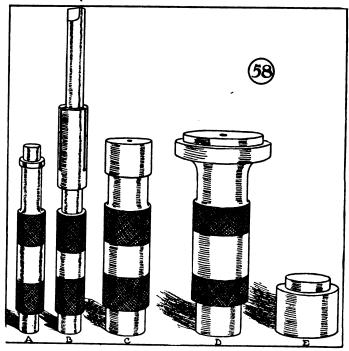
Arbor press tools for transmission. A, triple gear bushing reamer; B, brake drum bushing driver; C, slow speed bushing driver; D, reverse drum bushing driver; E, driven gear puller block.
